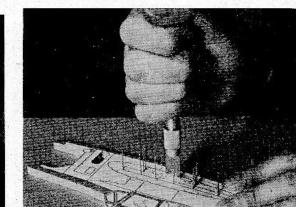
Cut wing slot carefully, making sure that the tool is held perfectly upright.
